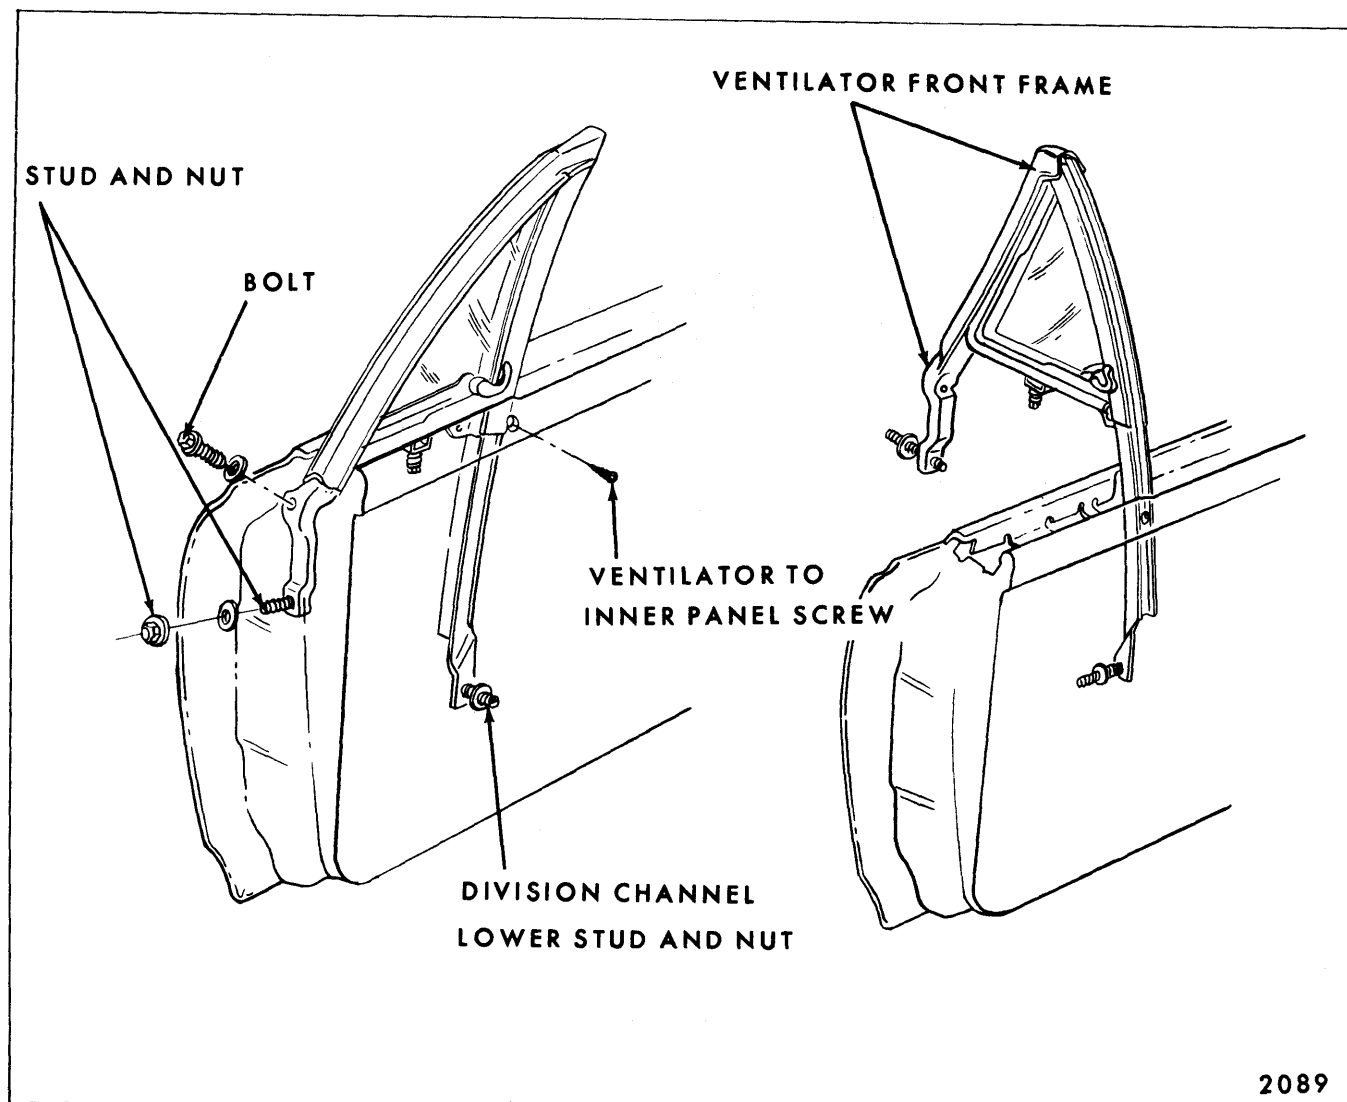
Front Door Ventilator Removal - "Z" Styles
